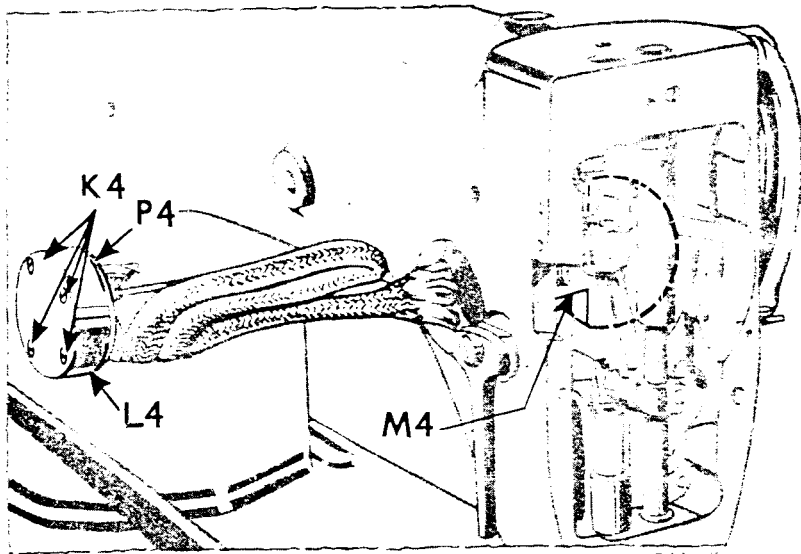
Replacing Oil-Removing Wick and Holder in Head of Machine
